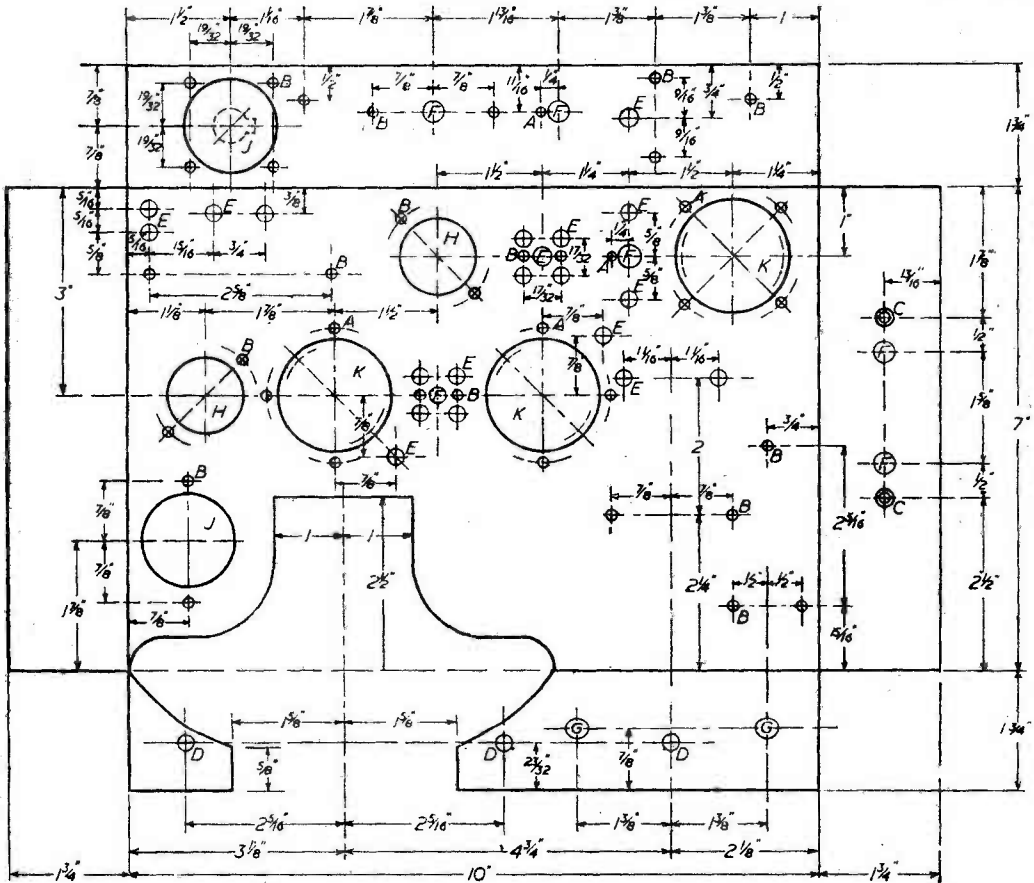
Chassis Drilling Data. For hole sizes see table below.
